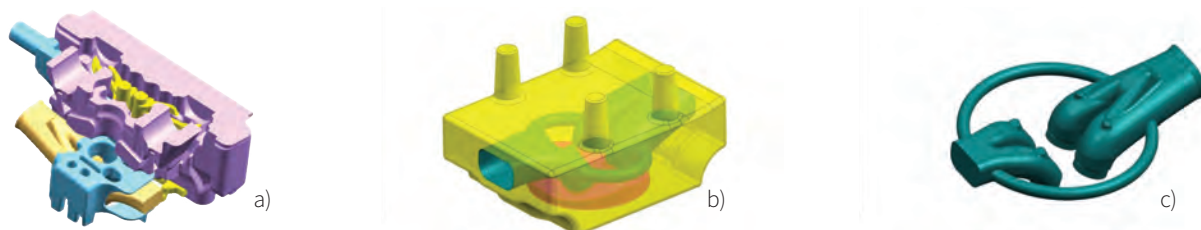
3D model shows core concept in casting: (a) part of complex geometry; (b) simplified test component with view of the part with marked core inside; (c) essential core structure with a ring for assembly purposes. Due to the complex shape, the core cannot be removed from the part without breaking.
